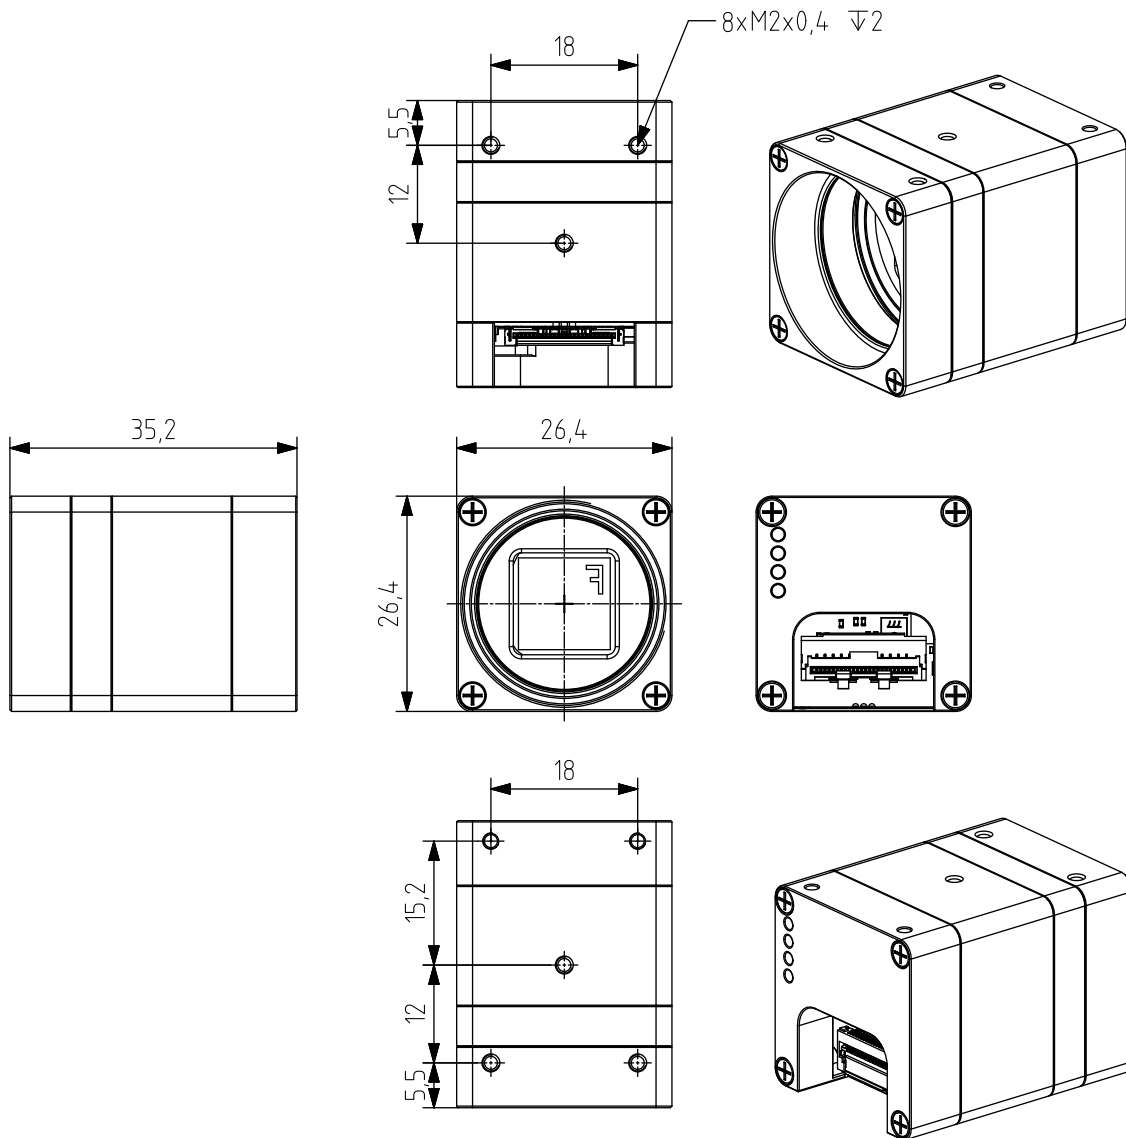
Dimensional drawing of MX042xG-CM-X2G2-FV (C-mount (with C-mount module B))
